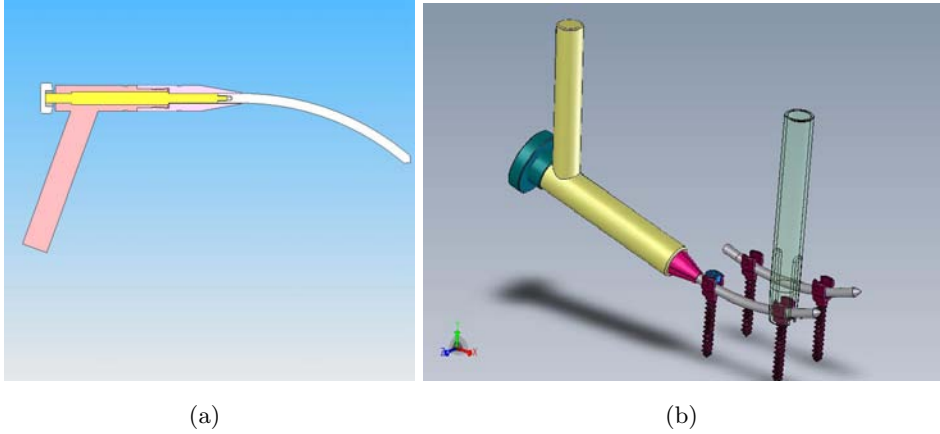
Three dimensional designed model of Protige, (a) side view, (b) Assembled in the solution
